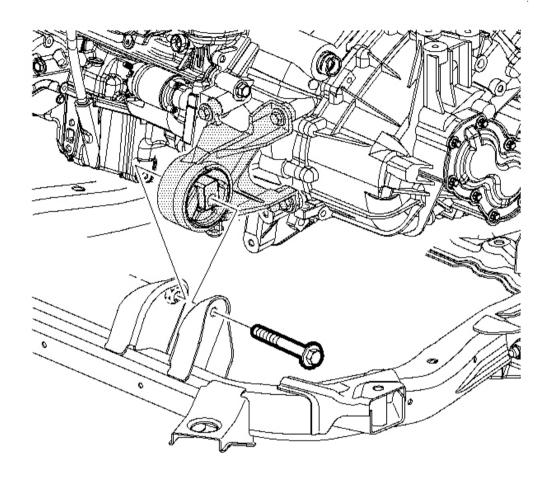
Front Transmission Mount Through Bolt Courtesy of GENERAL MOTORS CORP.
